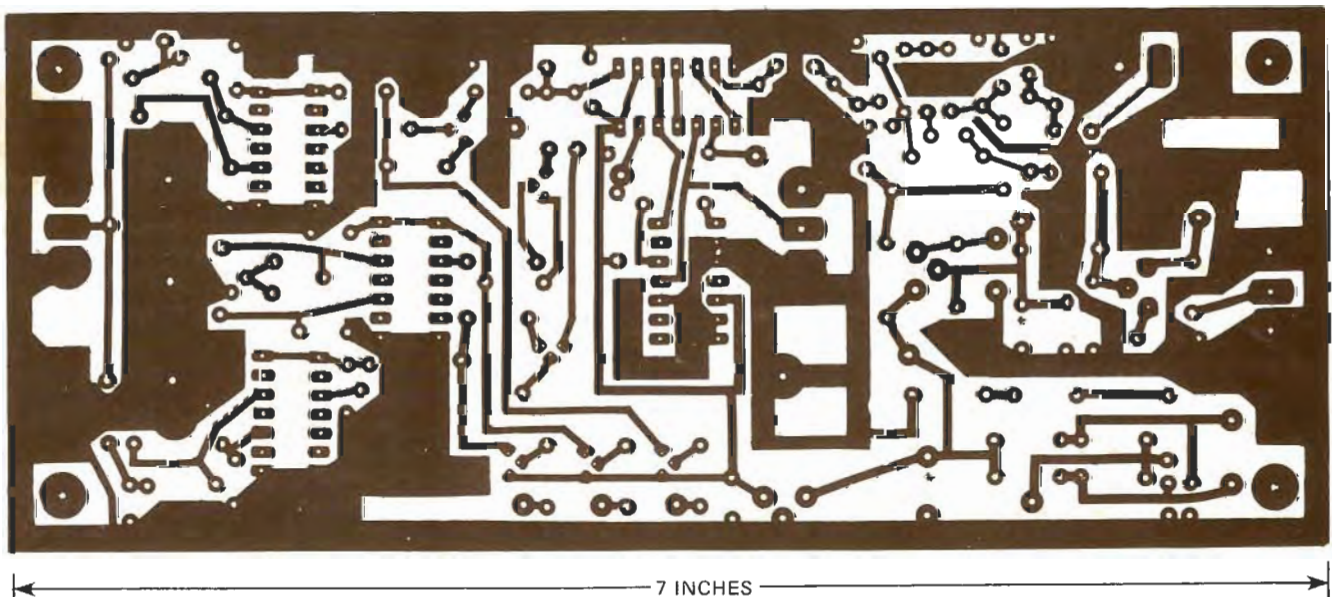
THE COMPLEX VCO circuit can be built on a single-sided PC board using only three jumpers.
